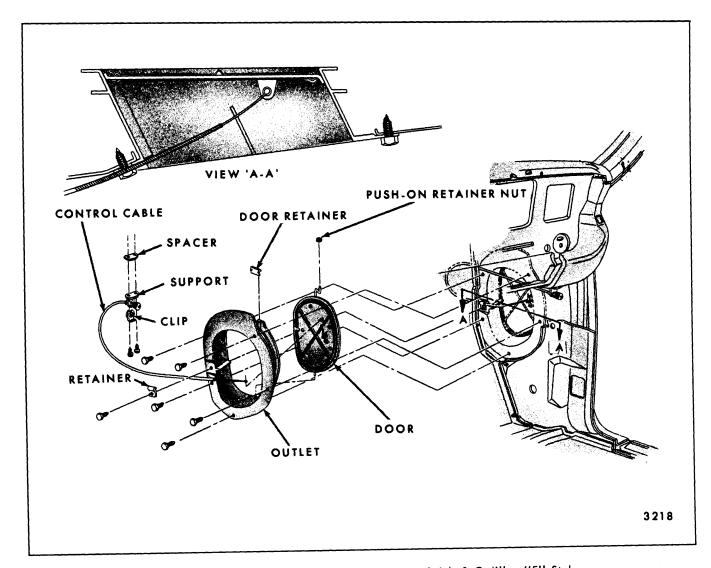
Shroud Side Air Duct Outlet and Door - Buick & Cadillac "E" Styles
